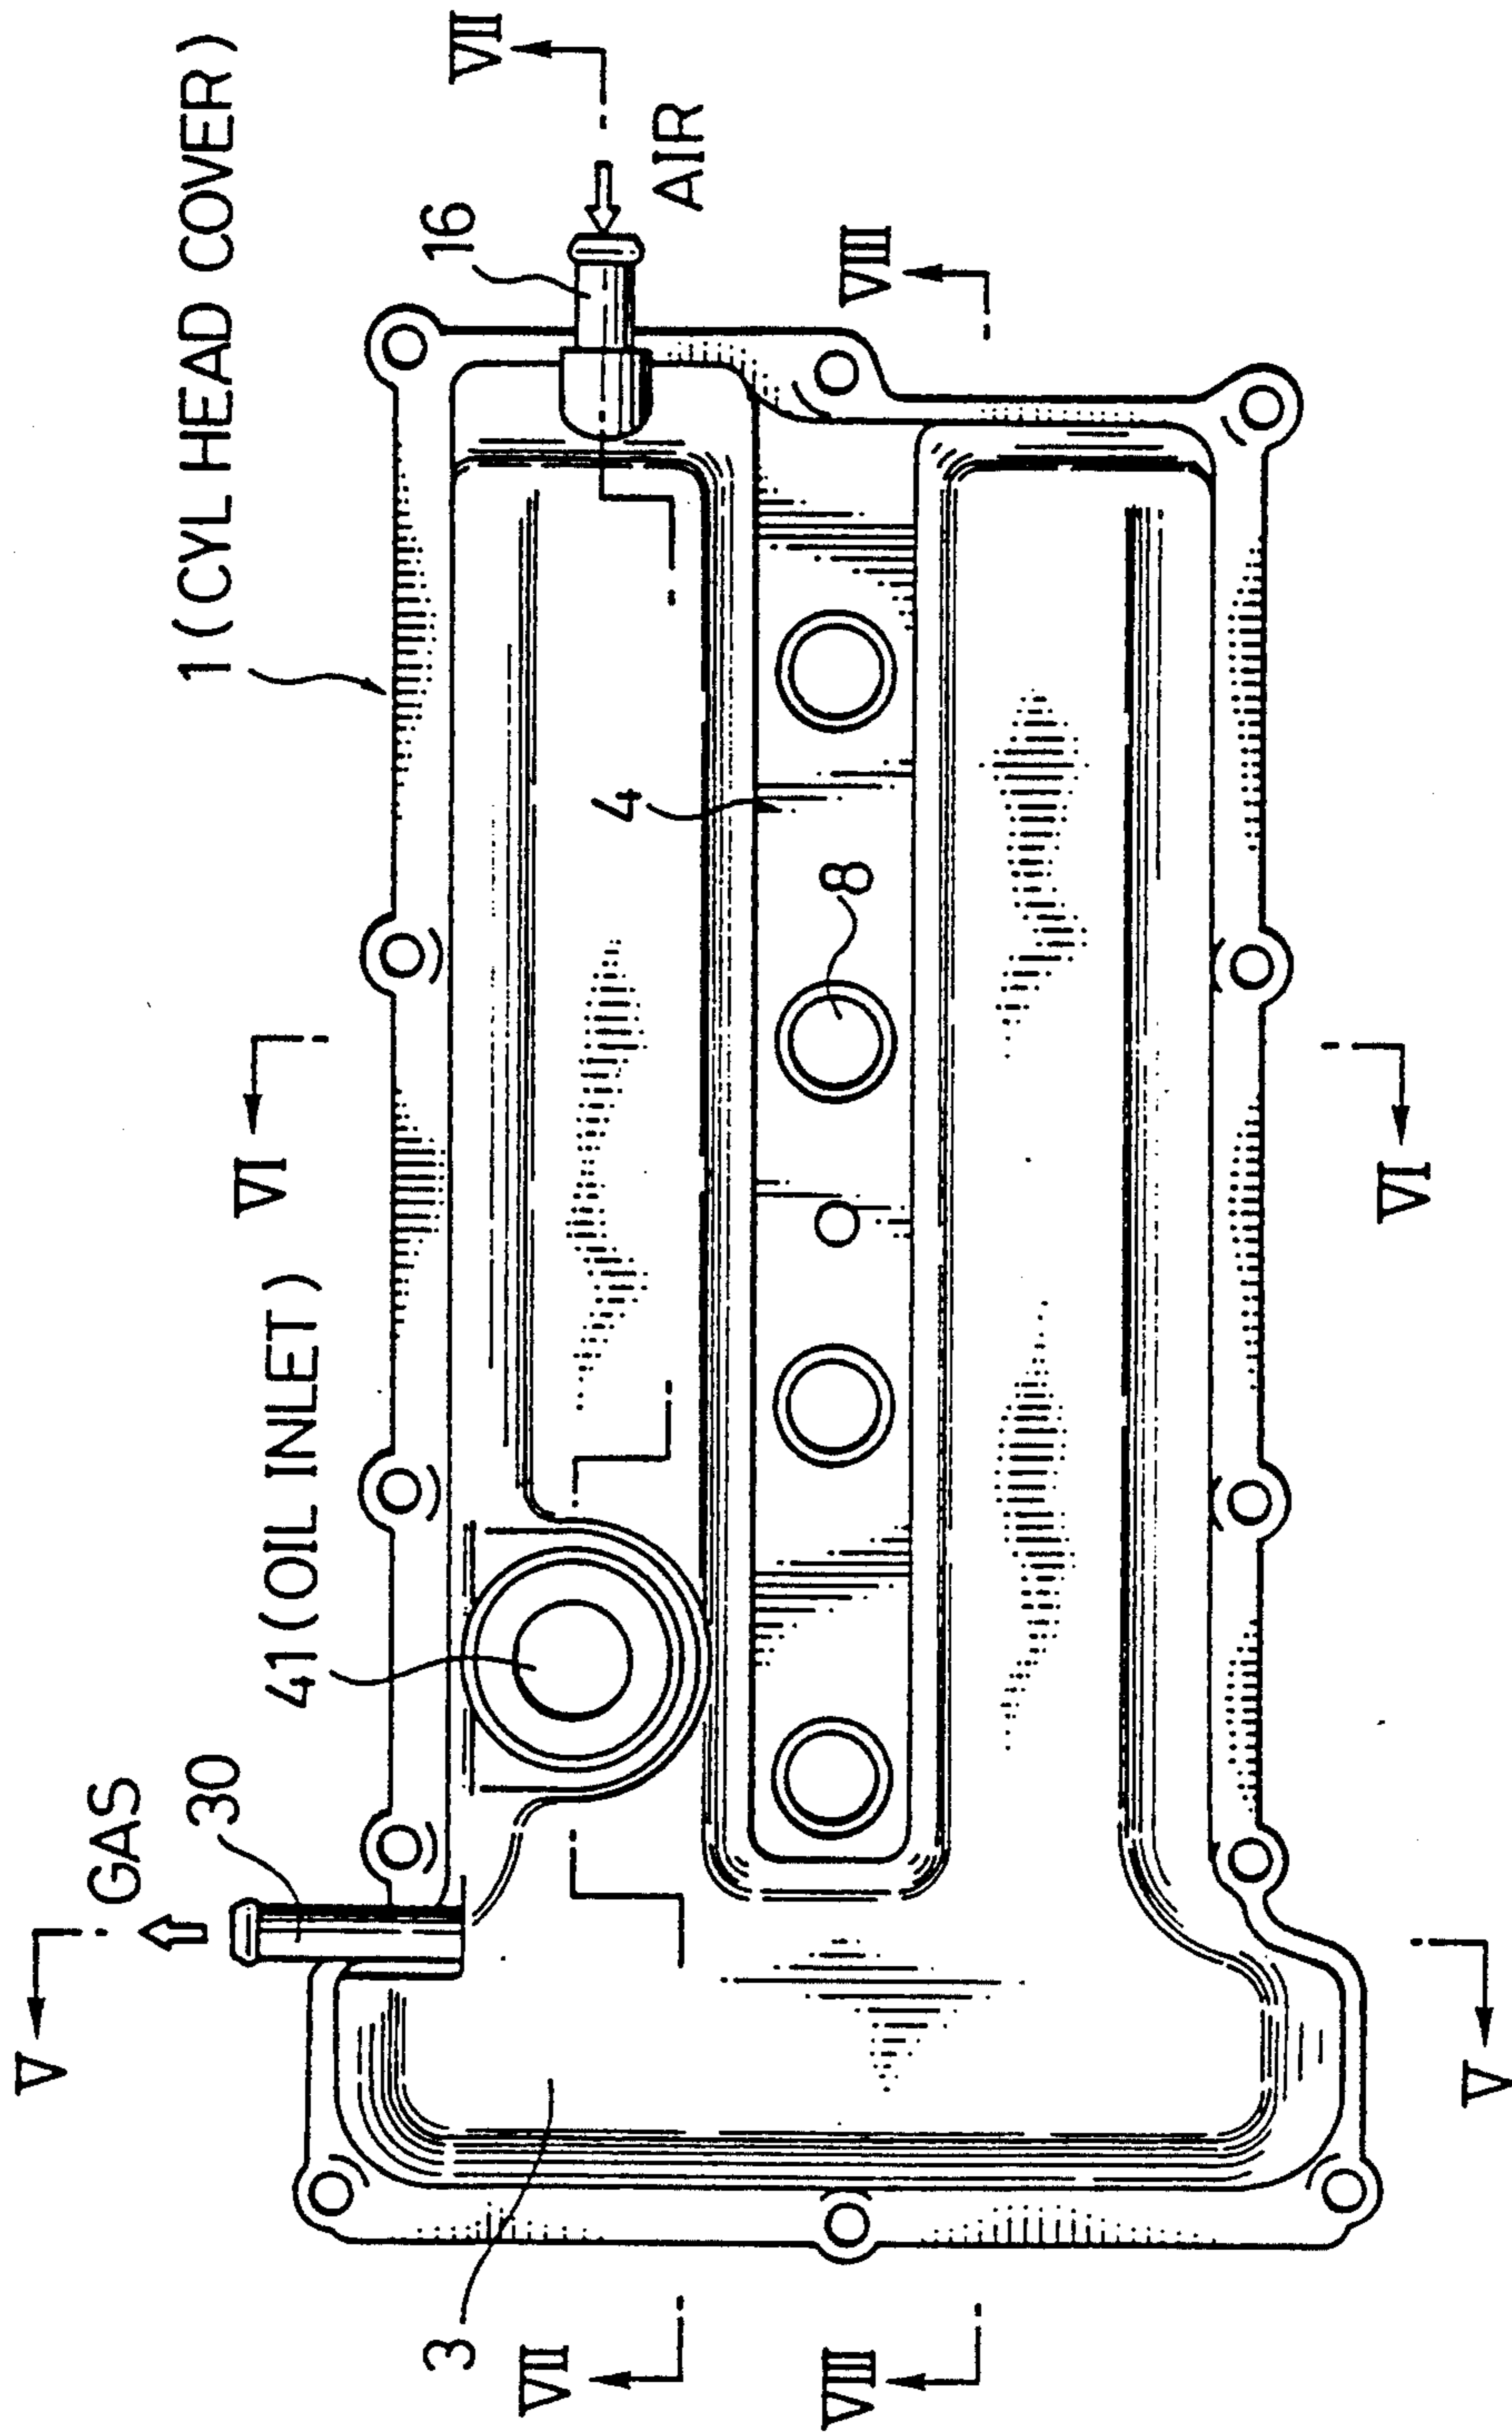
(BOTTOM VIEW WITH UNDER COVER)
